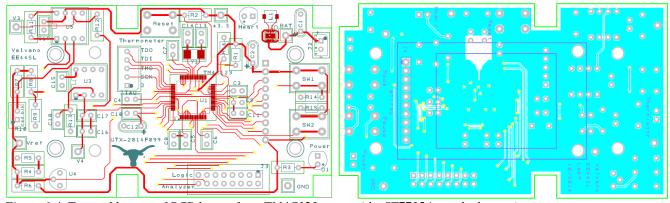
Top and bottom of PCB layout for a TM4C123 system (the ST7735 is on the bottom).
